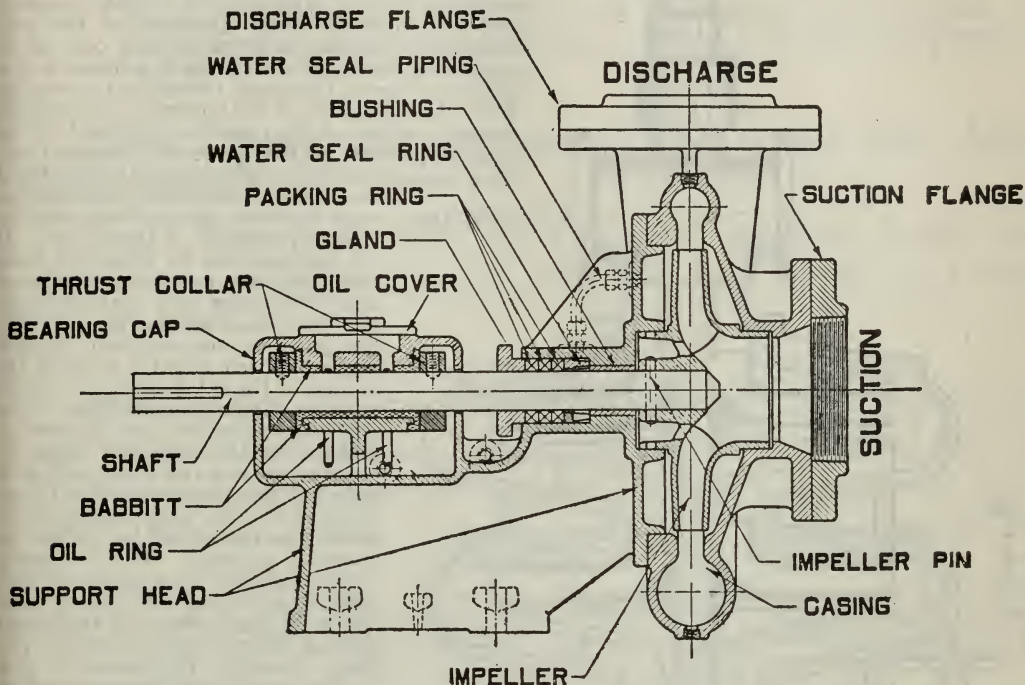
,312.—Section of Goulds single stage single suction centrifugal pump, enclosed impeller type, showing parts.
